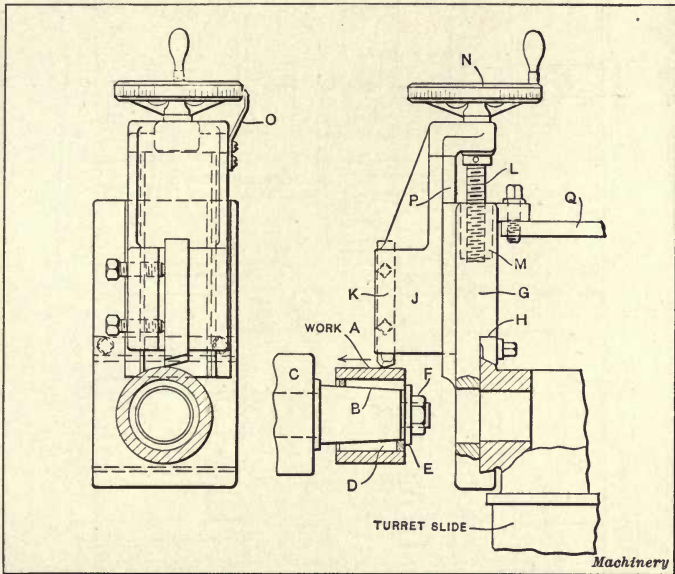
Adjustable Turning Tool for finishing the Outside of Short Bushings
